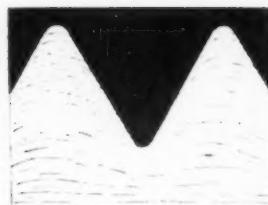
Cross section of a rolled thread showing the refinement which has taken place in the grain flow of the blank during the rolling process.
